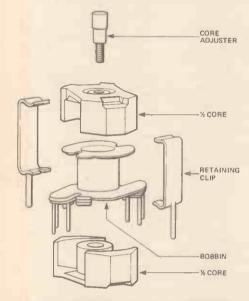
Exploded drawing of the RM6 pot core. Some types appear to have only two connecting pins per side, but will nevertheless fit the PCB holes.
